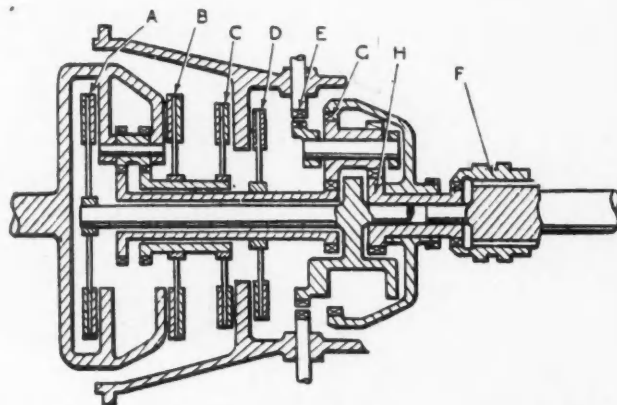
Diagrammatic drawing of Hobbs seven-speed transmission. KEY:—A, B, C and D, Clutches. E, Pawl. F, Dog Clutch. G, Ring Gear. H, Sun Gear. Parts engaged for following gears:—Reverse:—C (or B), E; F with G. Neutral:—E; with H. First:—E; F with H; C. Second:—B, E; F with H. Third:—A, D; F with H. Fourth:—A, C; F with H. Fifth (direct):—A, B; F with H. Sixth (overdrive):—A, C; F with G. Seventh (overdrive):—A, D; F with G.
